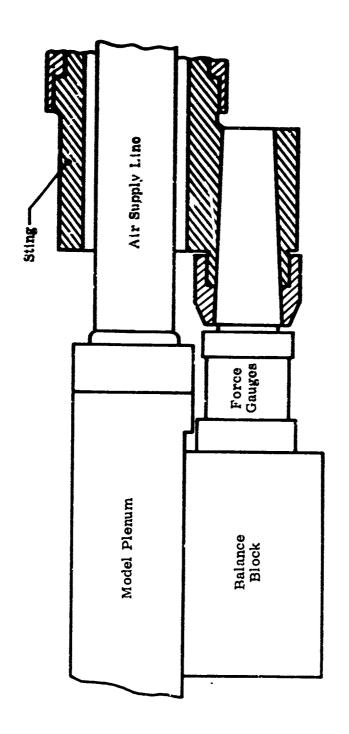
AIR SUPPLY STING - BALANCE ASSEMBLY
